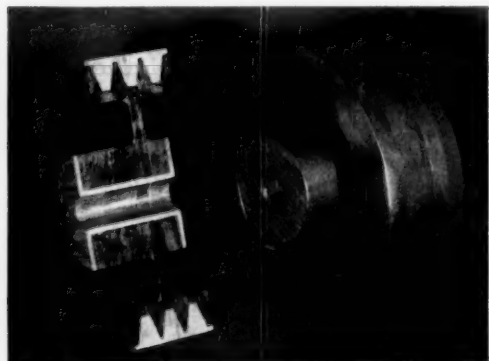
Wood models of the problem casting. Section at the left is painted to show the finish-machined sheave (dark) with the machining stock (light areas).
